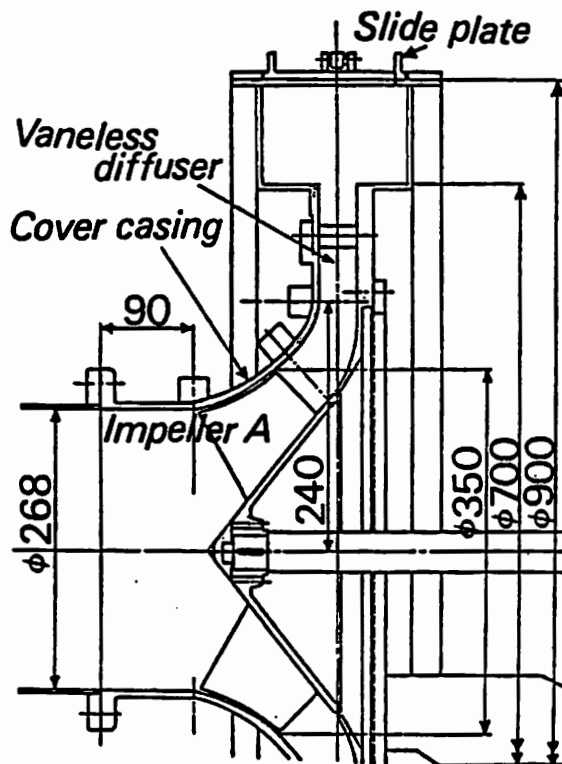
Detailed configurations of the impeller passage: Impeller A.
